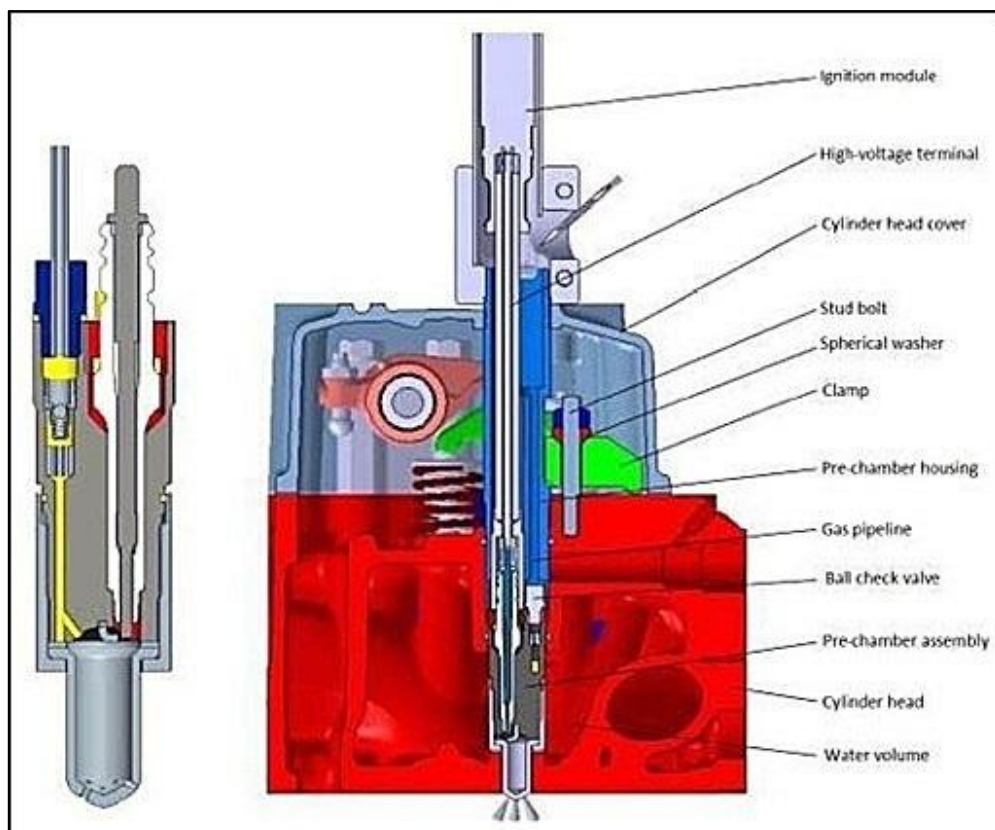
Pre-chamber Module Setup(left) and Cross-section of the cylinder head with pre-chamber assembly(right)
